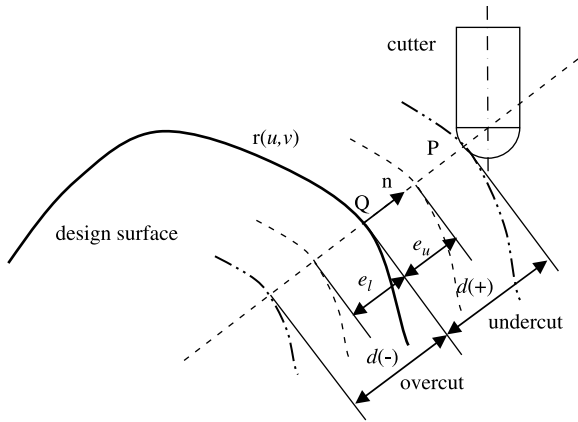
Numerical inspections: overcut and undercut between the machined workpiece and the master model.
